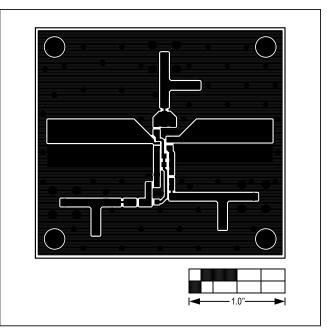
MAX44250 EV Kit PCB Layout—Component Side
